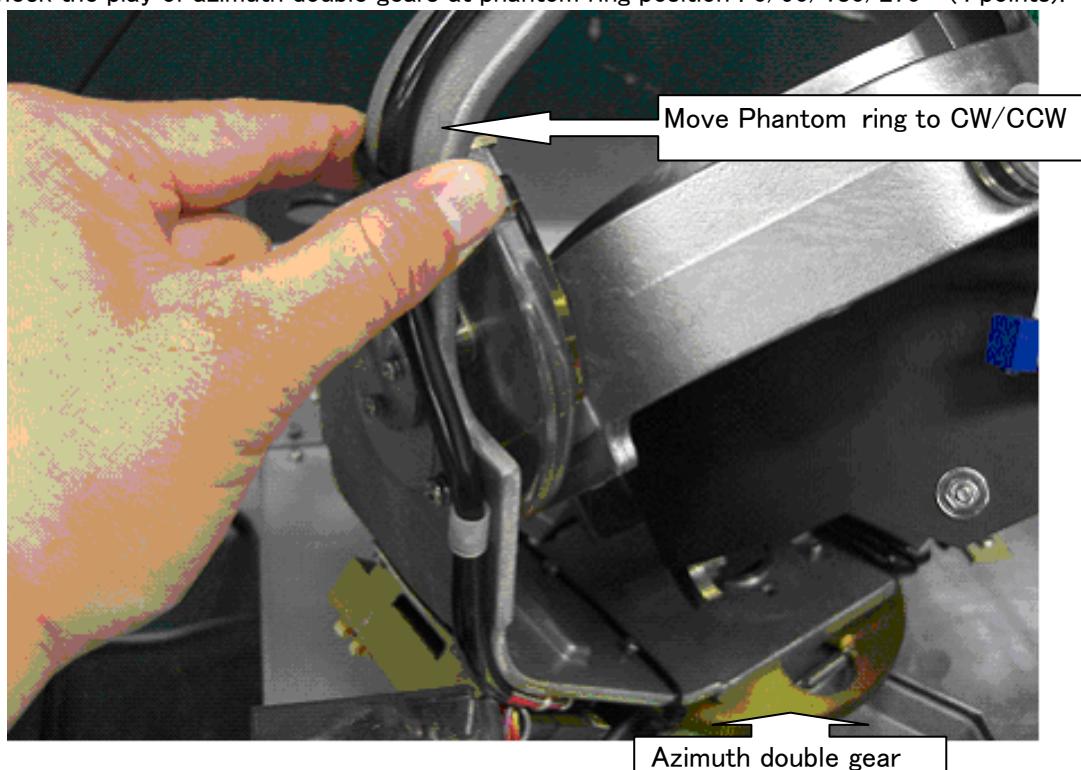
(1) Phantom ring (azimuth double gears) play check
